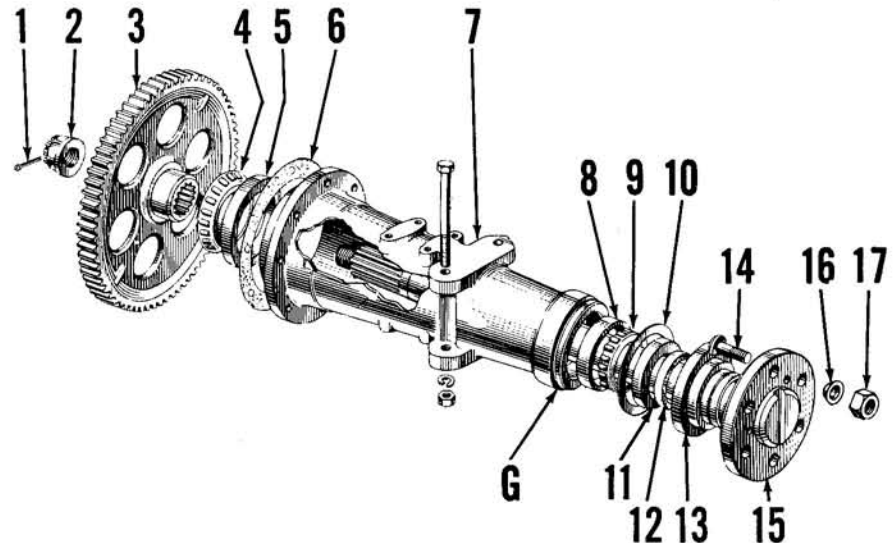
Exploded view of rear axle, housing and related parts. On late production, rear wheel nuts (17) and tapered retainers (16) are made in one piece. Oil seal retainer fits over outer end of axle housing; refer to Fig. 159.
